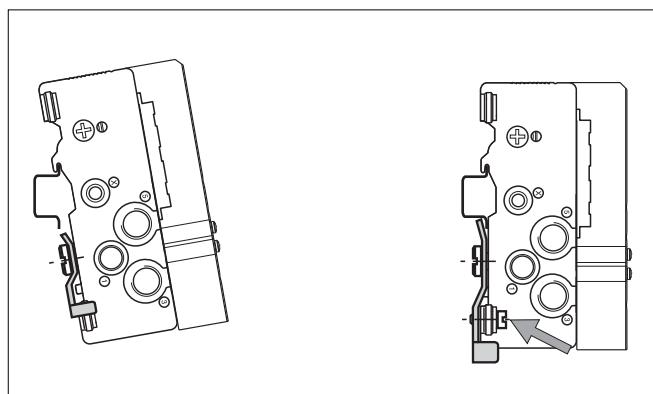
Hang the valve system into the DIN rail, lock it using locking levers and secure with screws
